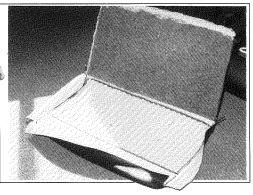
With the lower seam stapled to the board and padding in place, the assembly looks like this.
